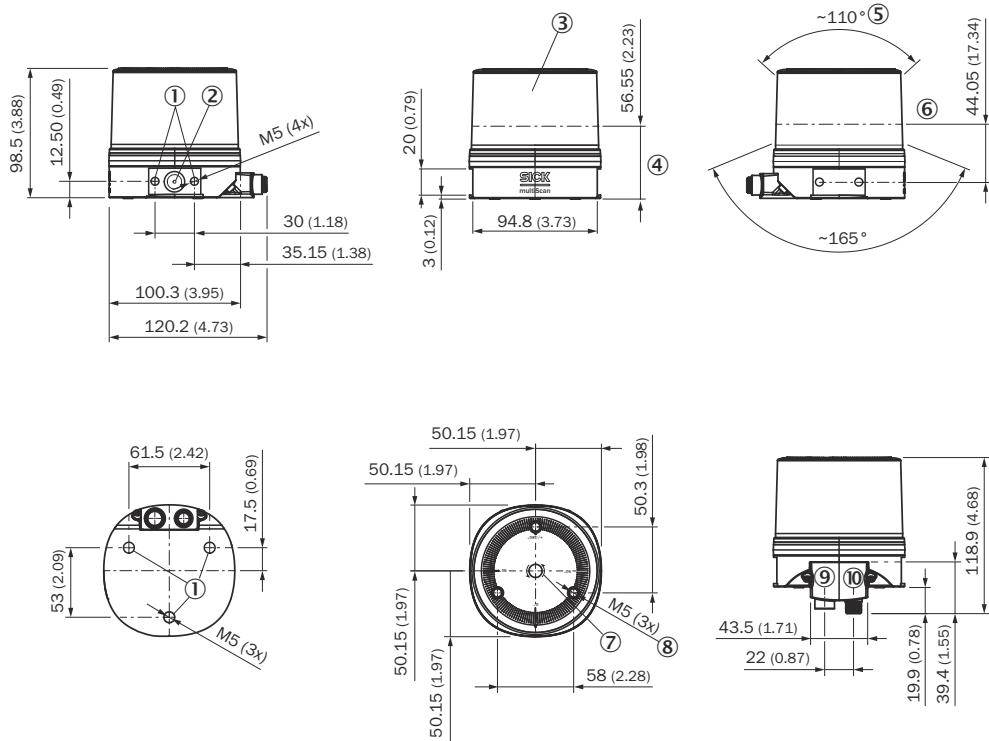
Device structure and dimensions, dimensions in mm (inch)
